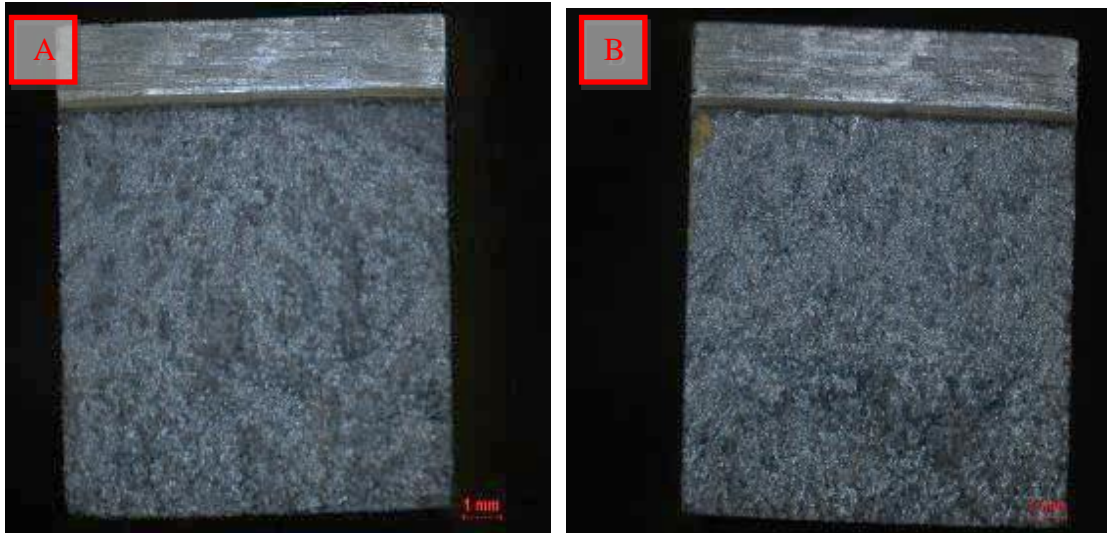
Fracture surface stereo image of the impact toughness testing samples showing a flat and shiny appearance, which indicate a brittle fracture mode.
